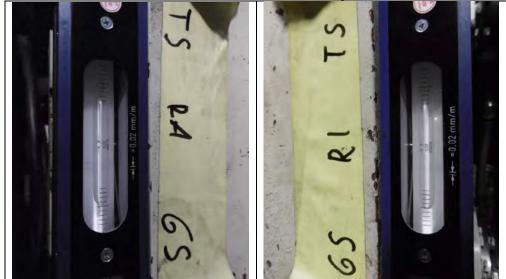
Altogether, these checks confirmed once more that the level check is a reliable representation of the tooth contact in the gear mesh.
